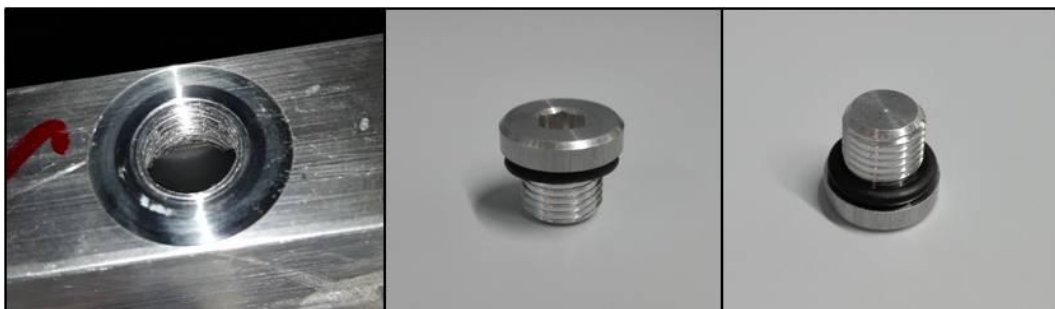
Threaded bushing created by thermal drilling (left) and aluminum plugs with Viton O-rings employed for closing the plate filling holes (center and right)
